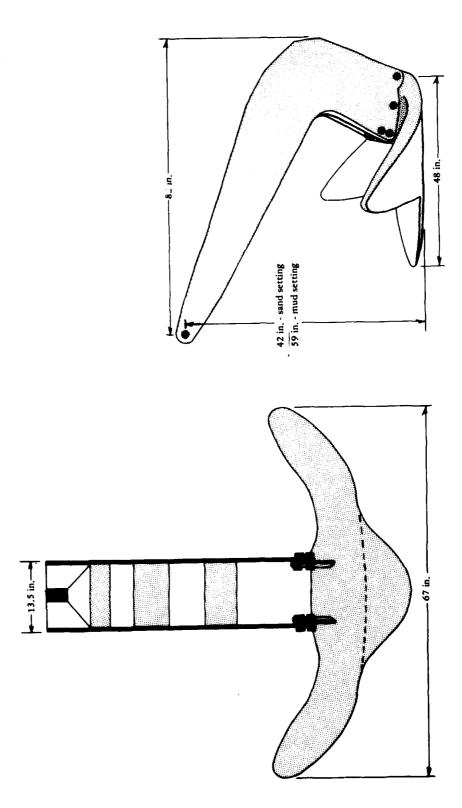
Dimensions of Twin-Shank Bruce Anchor.
